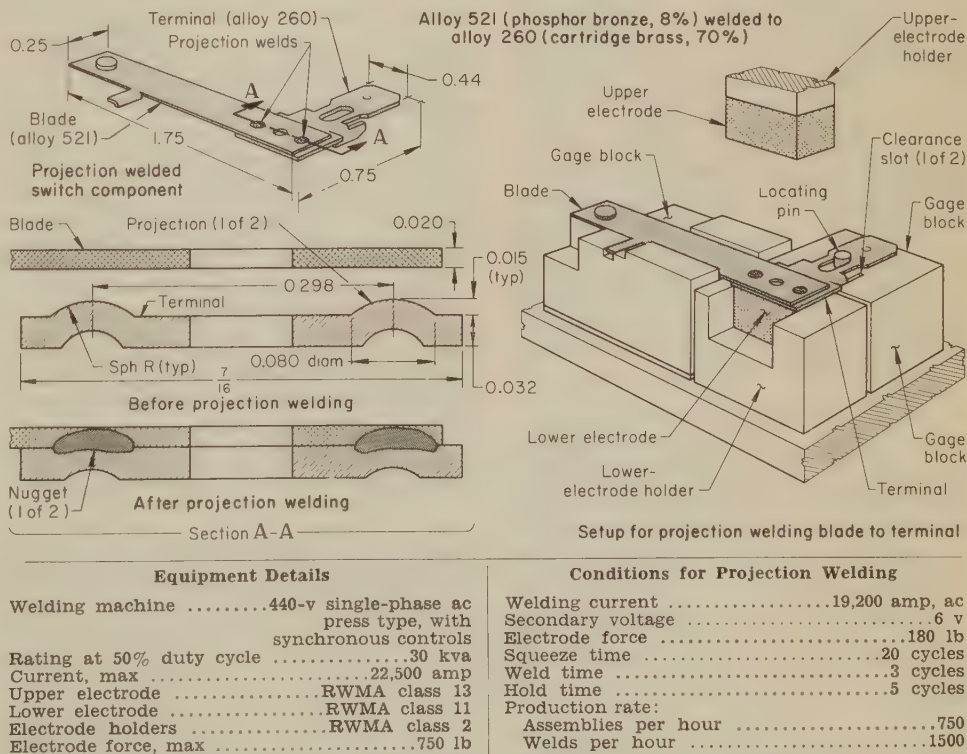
Switch component that was made by joining a cartridge brass terminal to a phosphor bronze blade, in the setup shown, using closely spaced projection welds (Example 428)
